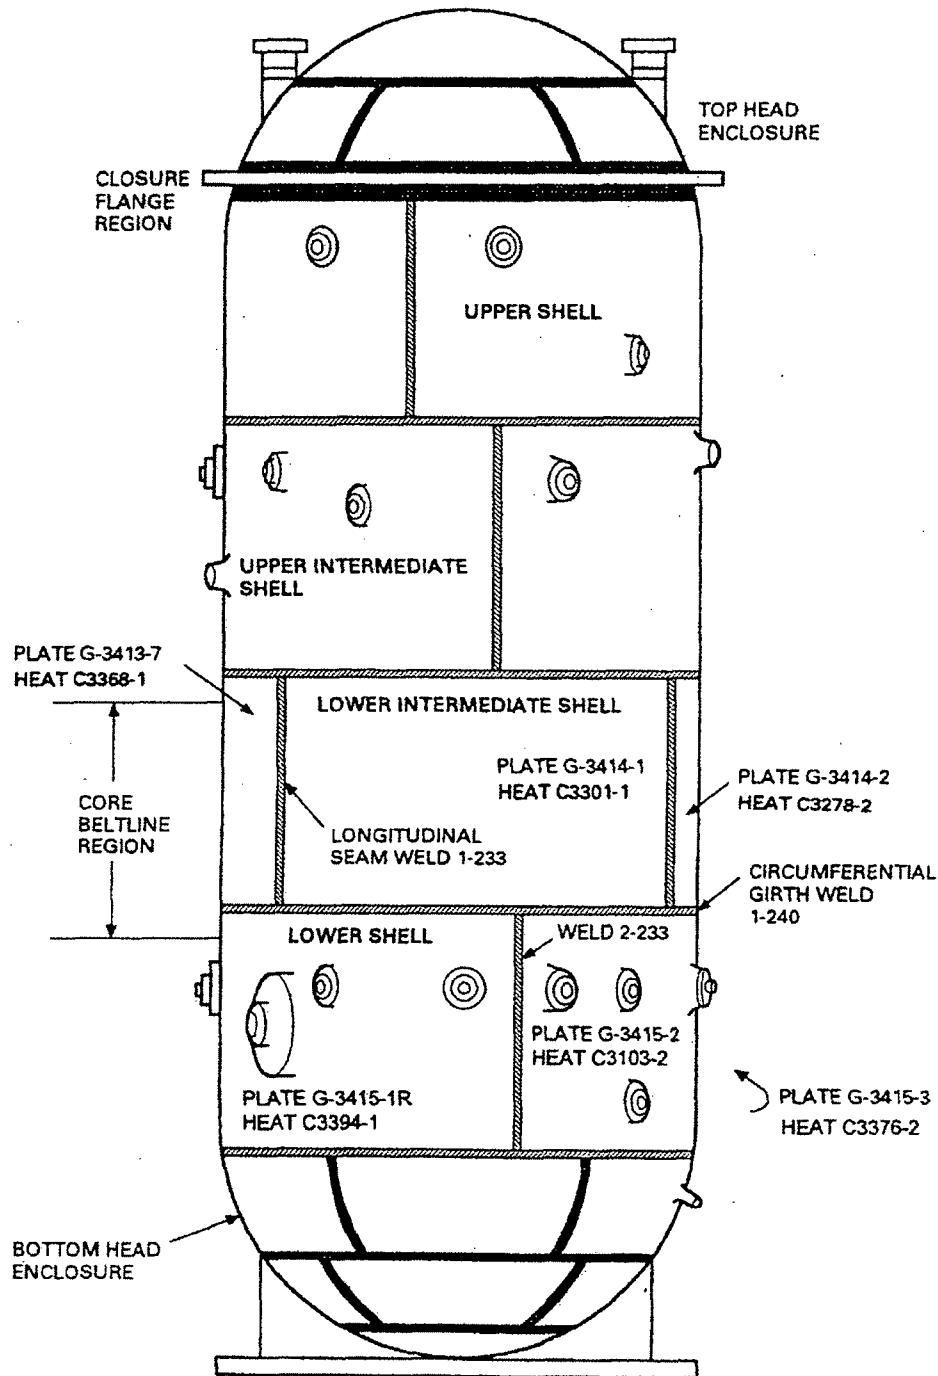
SCHEMATIC OF RPV SHOWING IDENTIFICATION OF VESSEL BELTLINE PLATES AND WELDS
